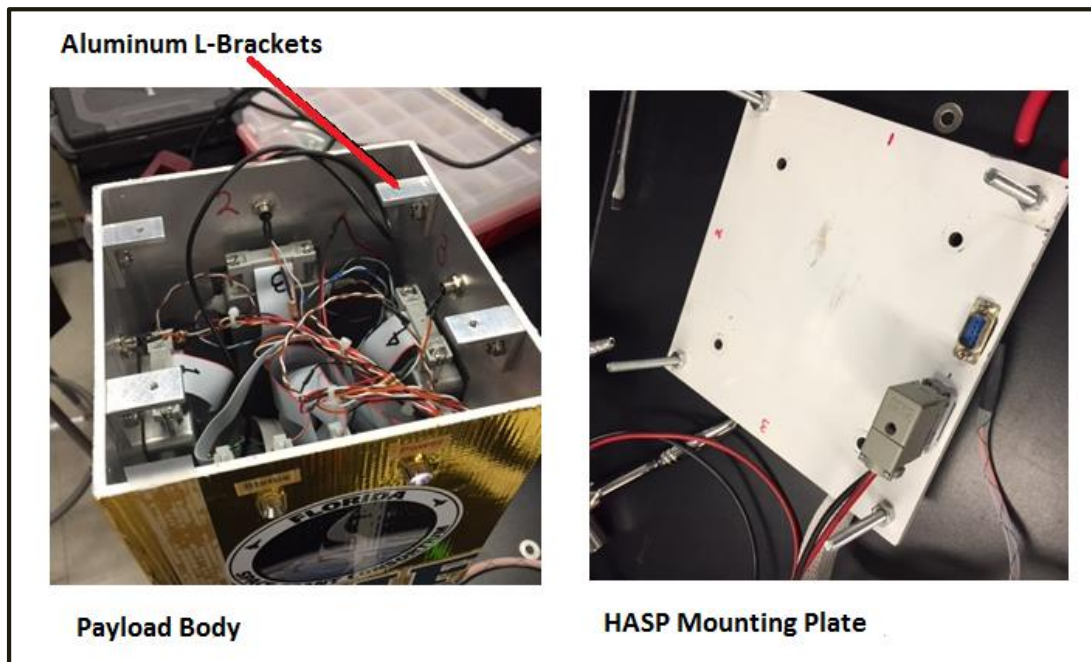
(k) Mounting of payload body with HASP plate by L-brackets
